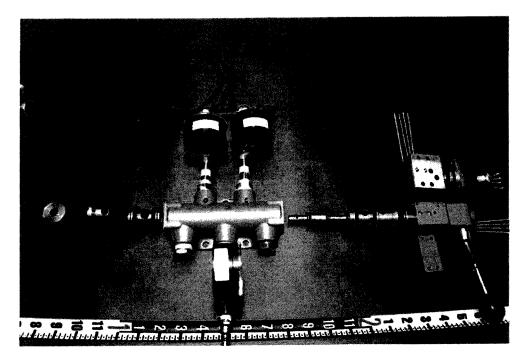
Close View of Exemplar Versa Bottom Dump Valve Components
